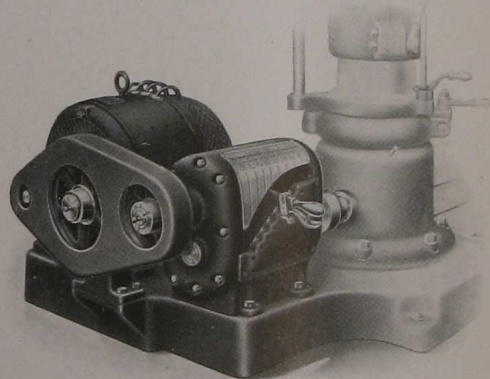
Constant Speed Motor Drive Thru Six Speed Box.
